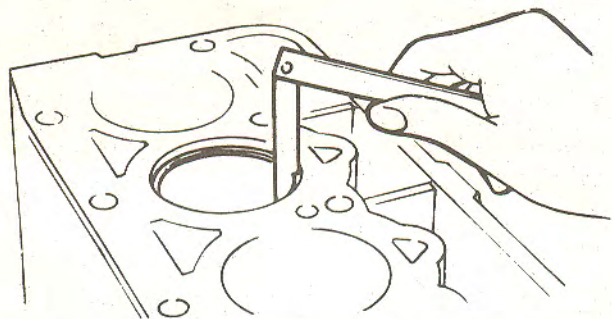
Measuring the piston ring gap with the ring inserted into the cylinder bore.
